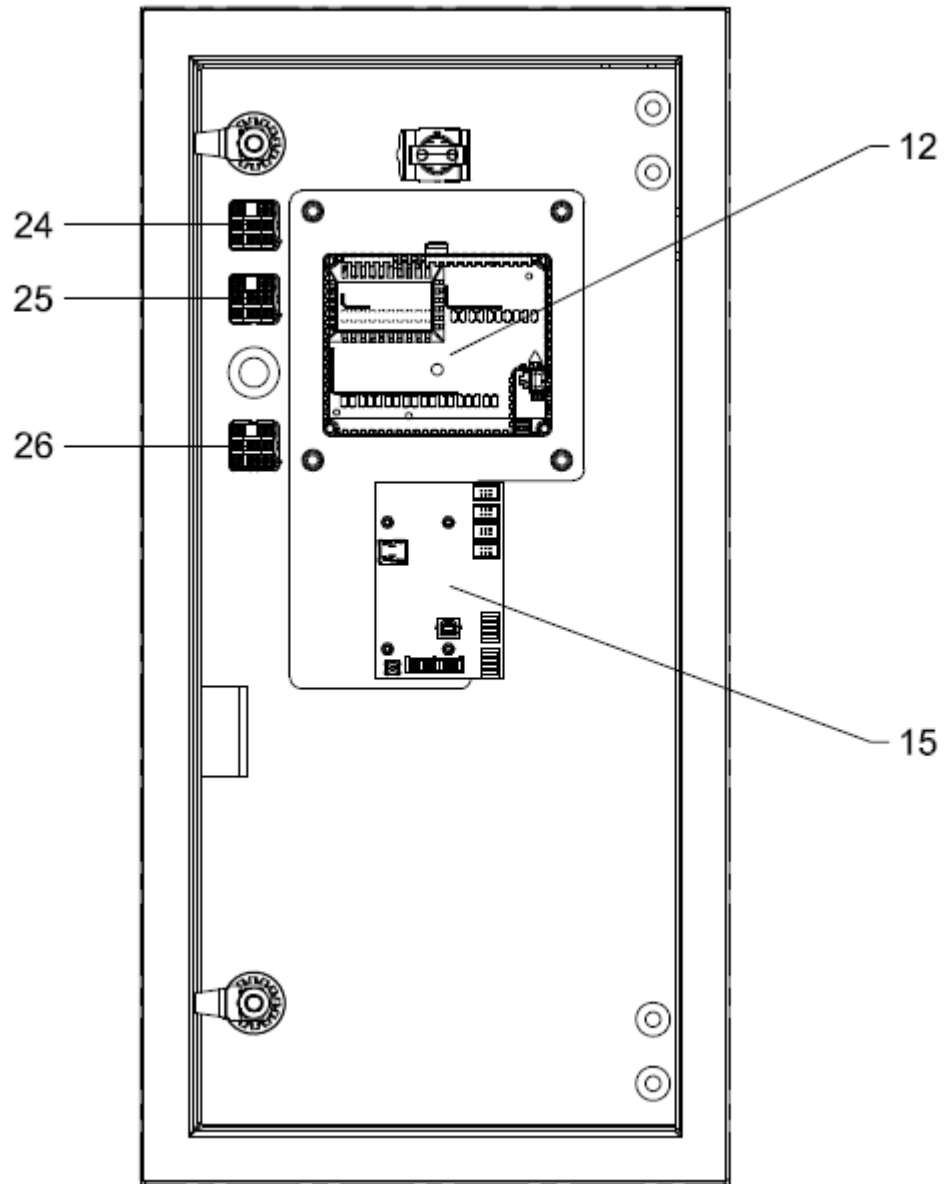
2500+ GPU Illustrated Parts List, Front Panel Assembly
